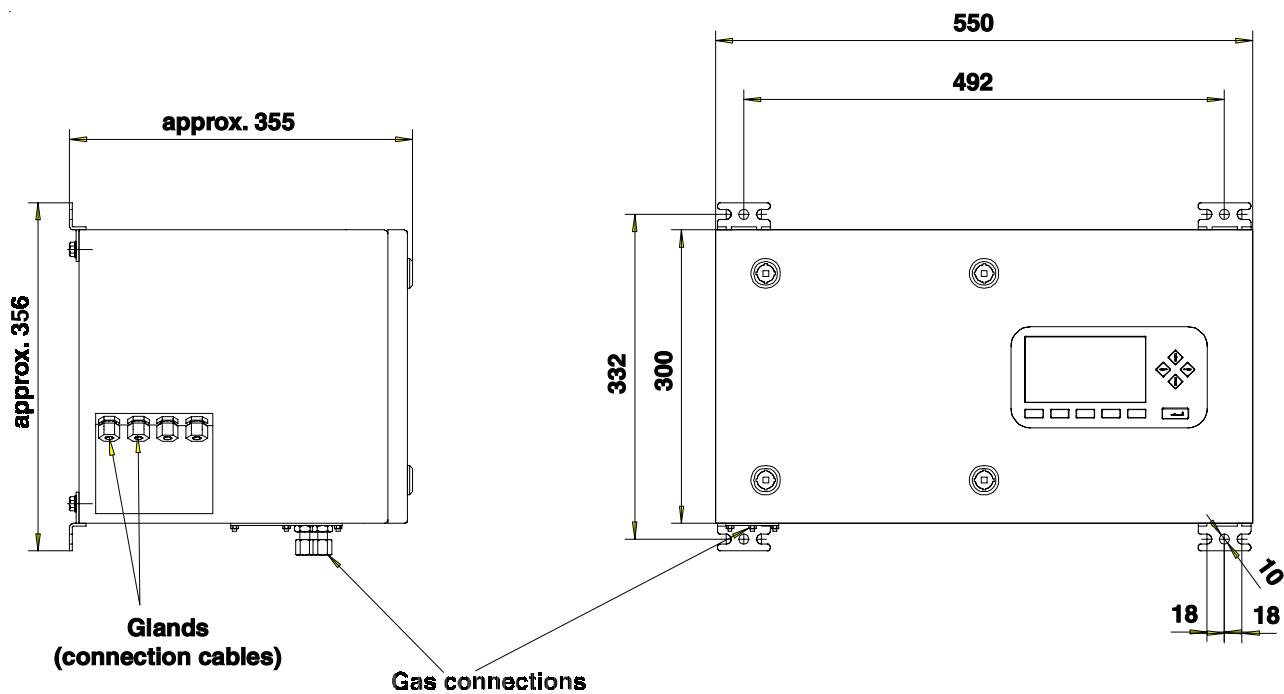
Dimensional sketch / Drill drawing MLT 2 Standard version [all dimensions in mm]
